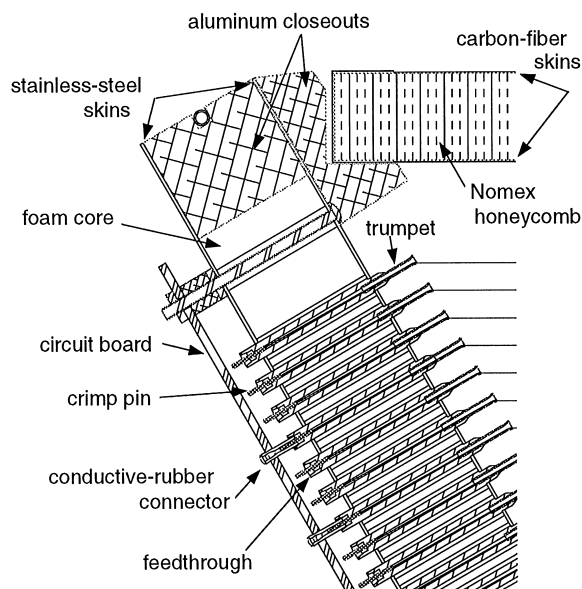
Schematic cross-sectional view of an R3 endplate highlighting the wire-positioning and chamber-frame hardware.
